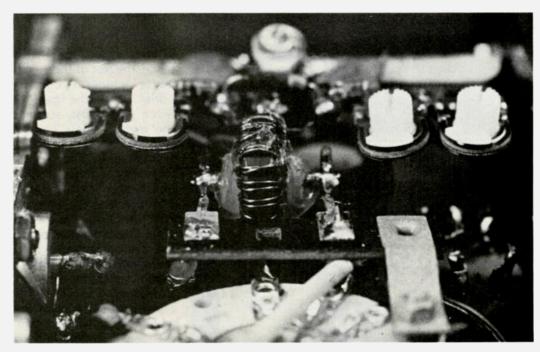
Photo D. Detailed view of the two-lug terminal strip and current transformer.
